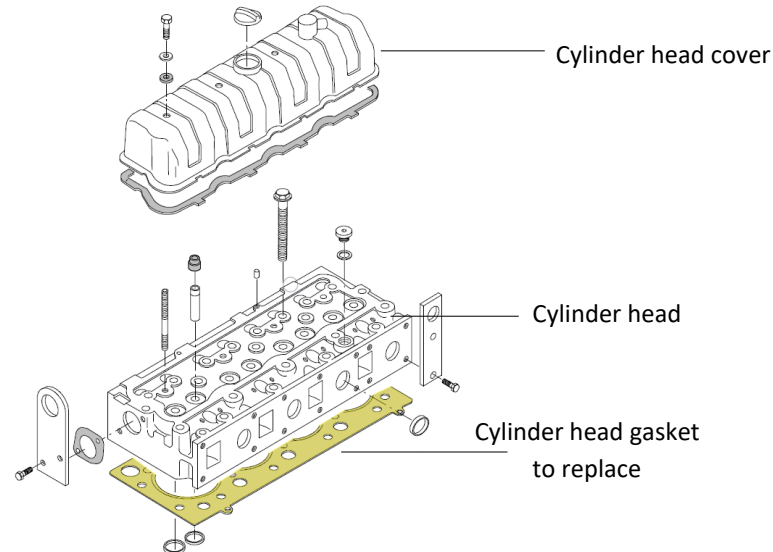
Cylinder head gasket (yellow highlighted) disassembling – adapted from Sisu Diesel Inc. (2002)
